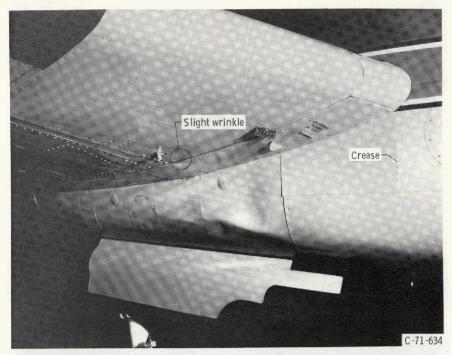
Damage to outboard bottom side of right engine nacelle and lower wing surface.
